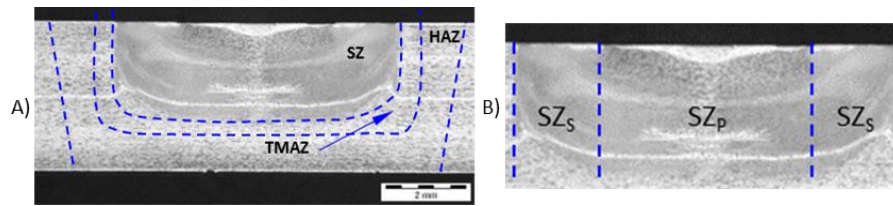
A) Optical microscope macrograph of a typical RFSSW connection cross-section showing the weld regions and B) detailed view of the Stir Zone.
